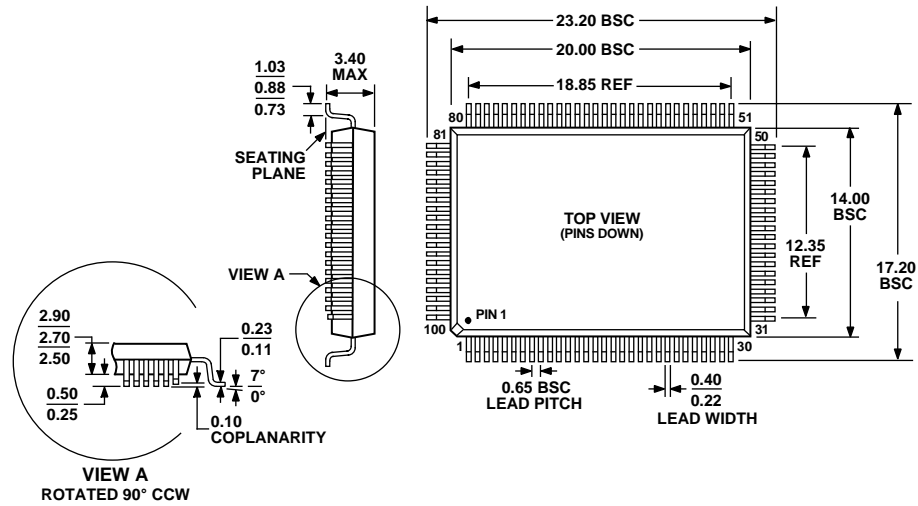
100-Lead Metric Quad Flat Package [MQFP]
